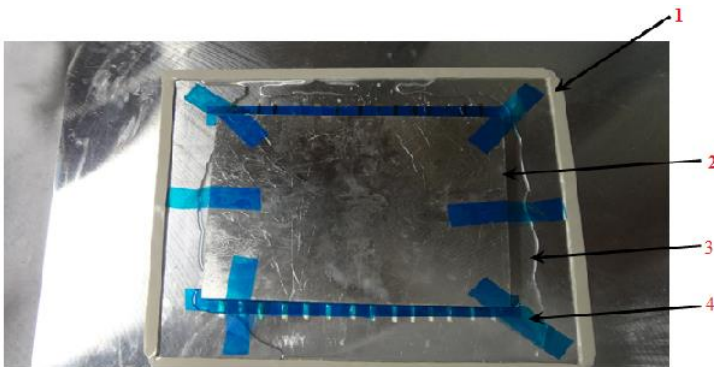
Photograph of caul plate secured in position with flash tape: (1) Tacky tape; (2) Caul plate; (3) Excess epoxy resin flow; and (4) Flash tape for securing the sample between the platform and the caul plate.
